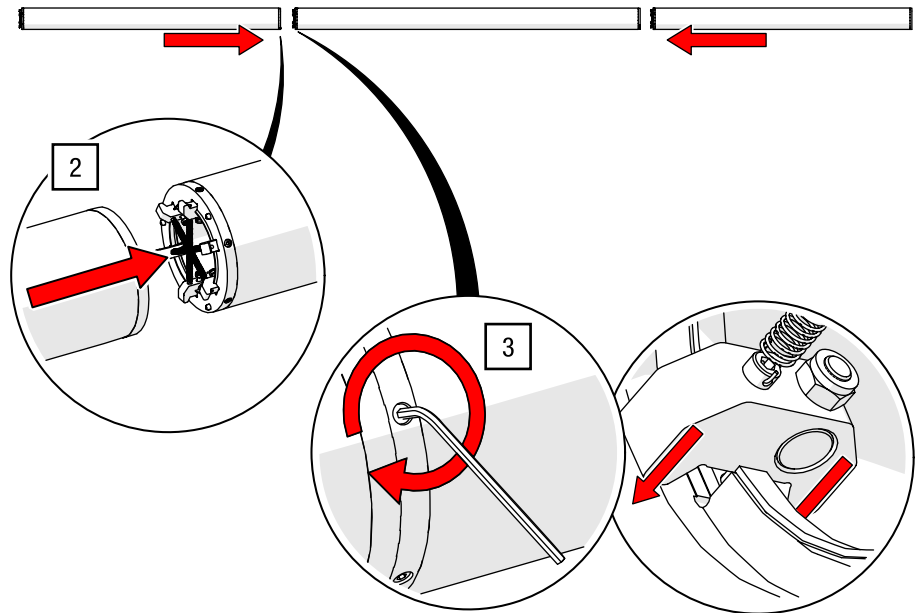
TUBE roller screen – CFRP-tubes are joined
